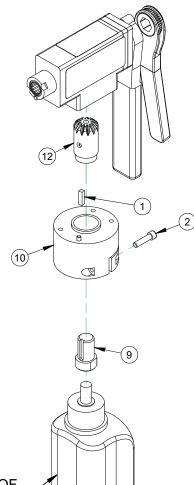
BG22 BOILER GUN ASSEMBLY (P/N 99871)
